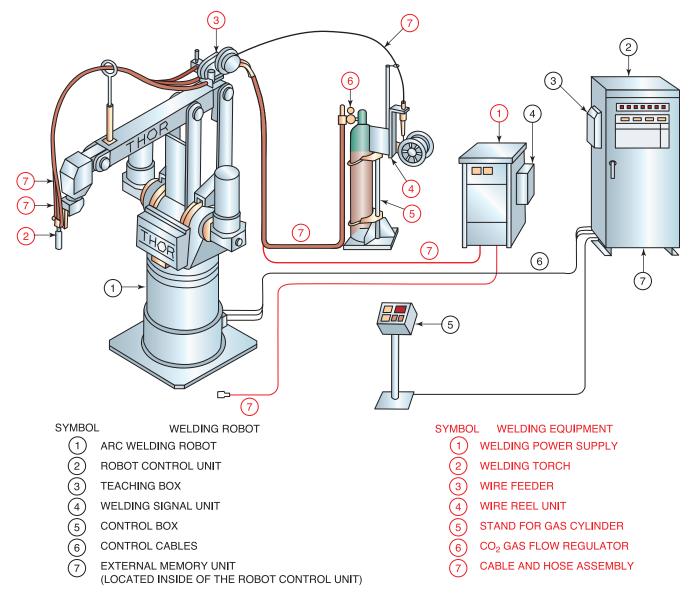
Computerized arc welding robot for gas shielded arc welding.
